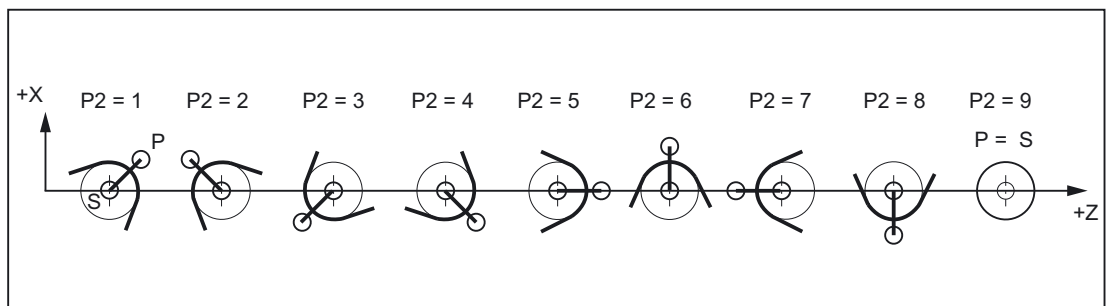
Tool parameter 2 (P2): Machining behind the turning center
